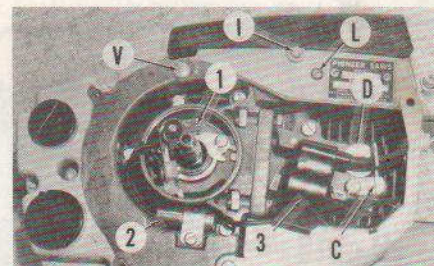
View of Ignition breaker points (1), condenser (2) and coil (3) with the flywheel removed. Clip (C) is used on models equipped with "Easy-Arc" starting to prevent the spark plug wire from holding decompression valve (D) open. The fuel tank vent valve is located at (V).
